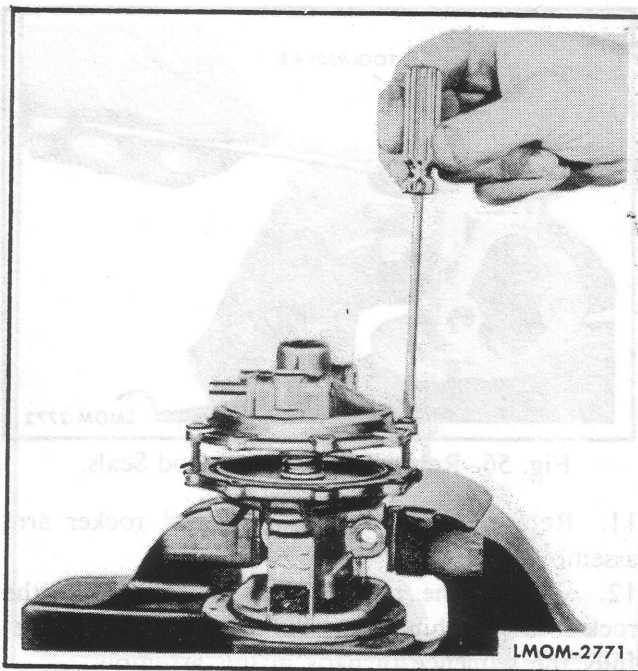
Alternately Loosen Each Long Screw to Remove Vacuum Body.
